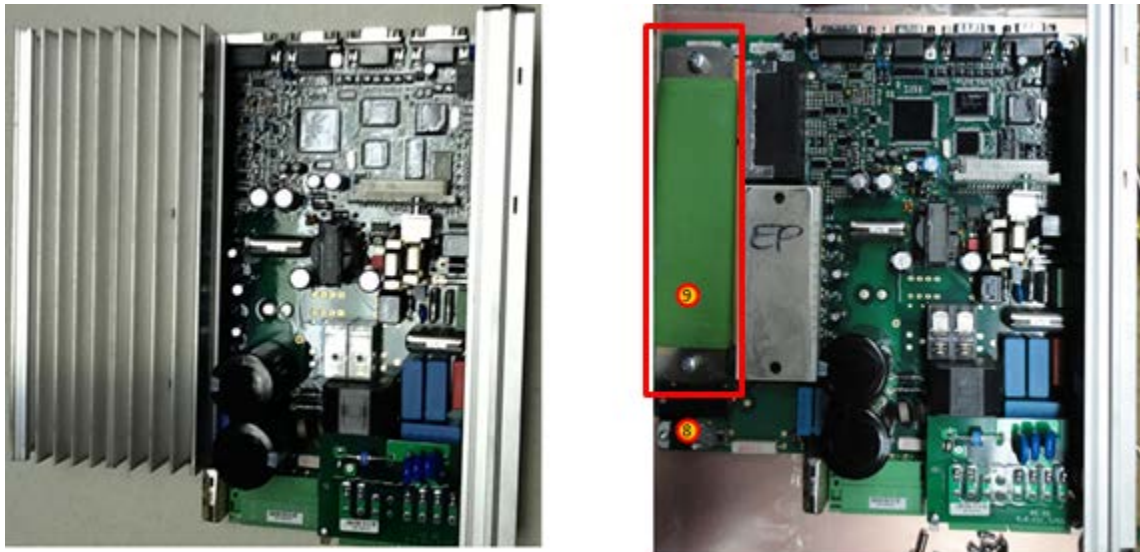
Servodrive board with Heat Sink (left) and without Heat Sink (Right)
